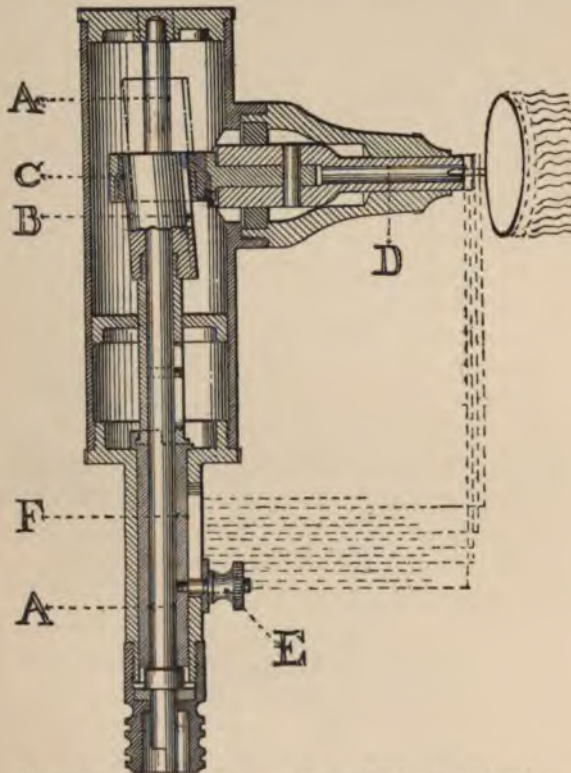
The Mechanism of the Bihlmaier Machine.
